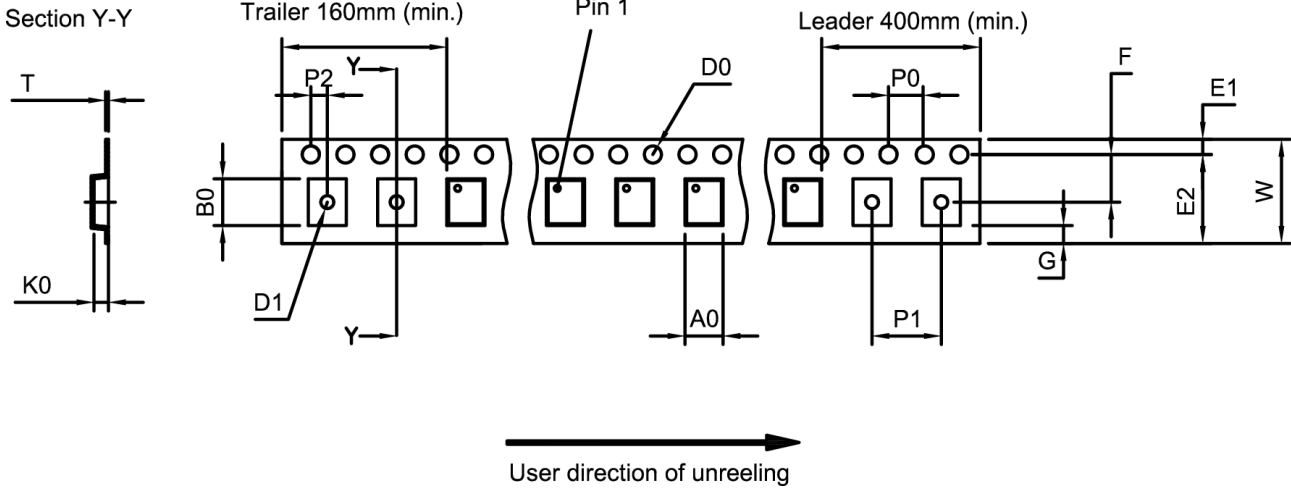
Drawing of tape (first-angle projection) with tape dimensions according to Table 1.
